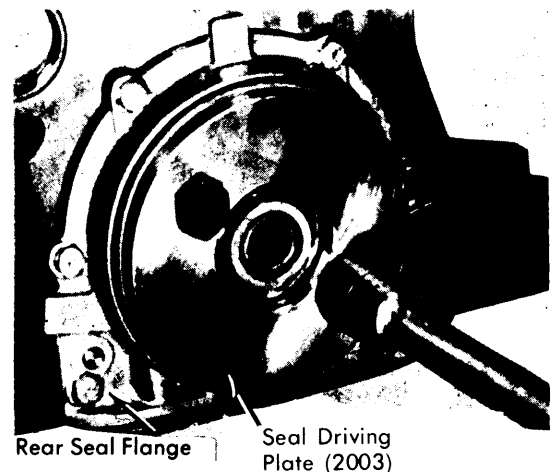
Using Special Tool to Install Rear Main Oil Seal
